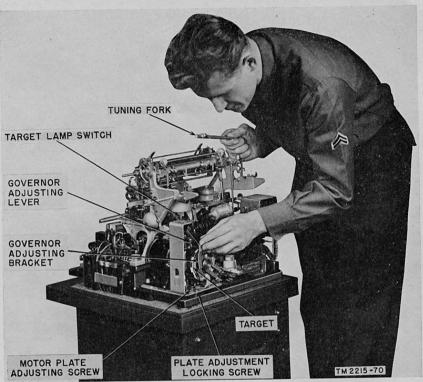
Checking and adjusting motor speed with target and tuning fork.
